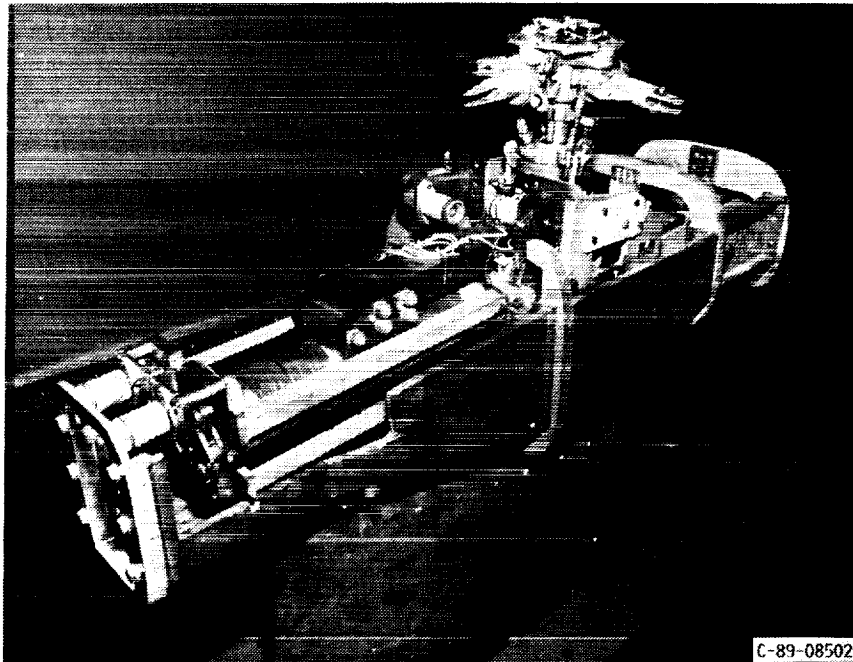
SIKORSKY PFM ROTOR HEAD AND FORCE BALANCE ASSEMBLY.
